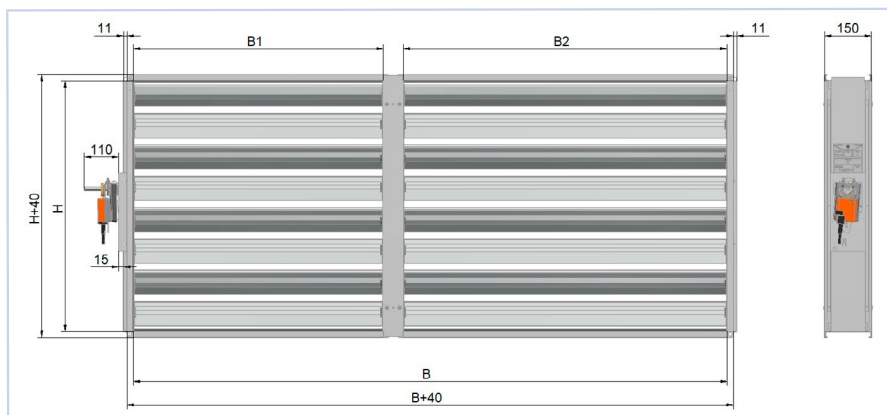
Dimensions TSK-4 and width 1550 mm - 2600 mm
